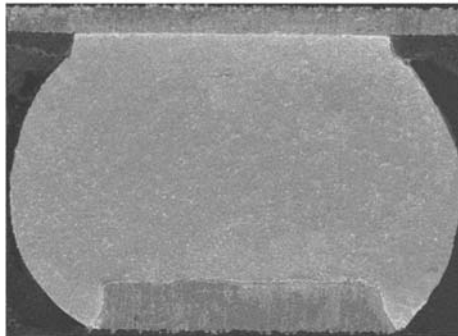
SAC305 Solder Joints Sample for Aging Studies
